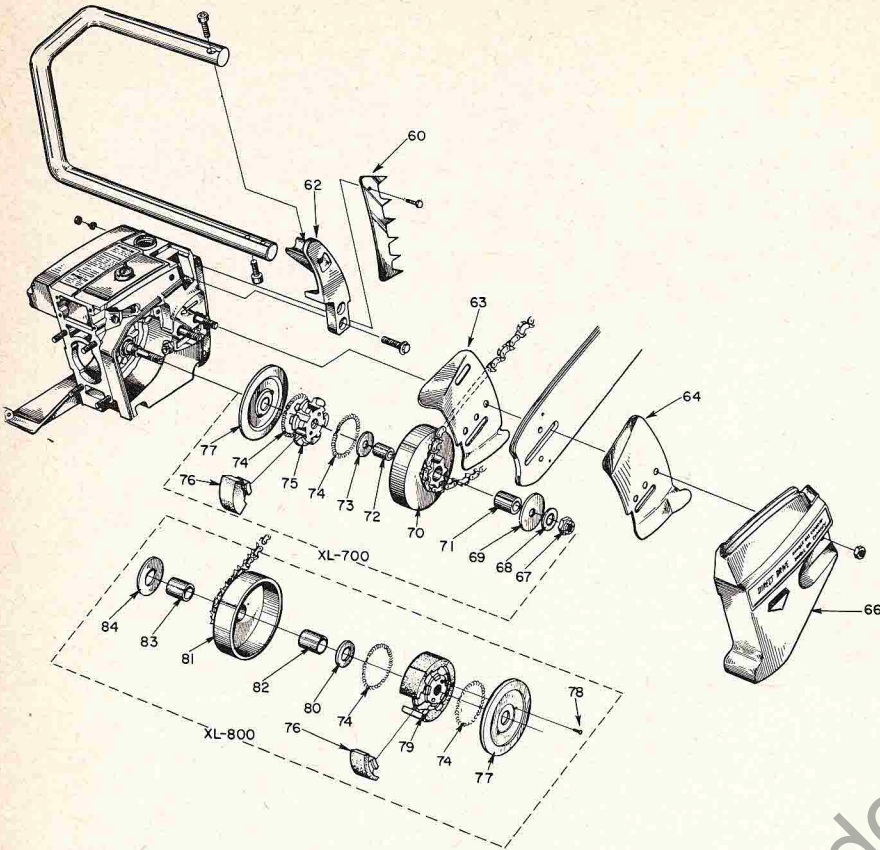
Exploded view of early type clutch assemblies for models XL-700 and XL-800. Late type clutch installation is similar except that plate, springs and shoes as shown in Fig. HL88 are used.
